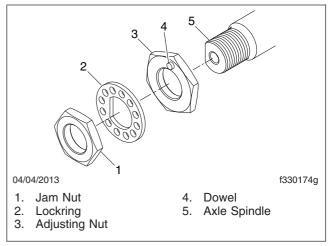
, Double Spindle Nut Set, With Lockring and Doweled Adjusting Nut
